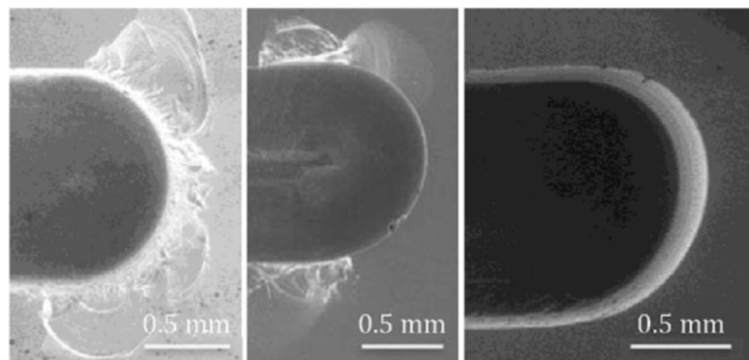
Example of chipping caused by the tool end deflection ($\phi = 0.8 \text{ mm}$) during exit from the slot at its end (left), after moving the tool backwards (center), with spindle off (right) [4].
